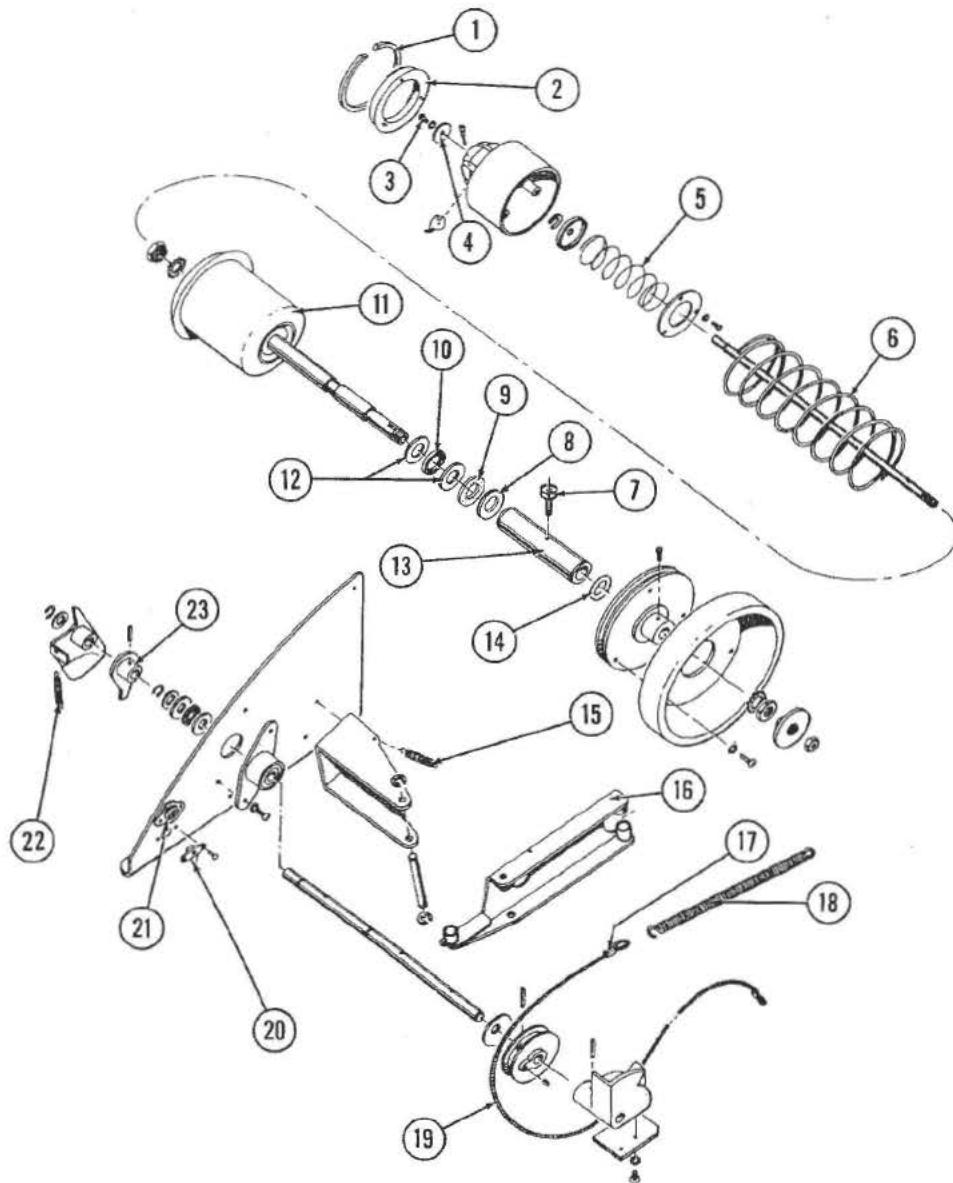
TURNTABLE SHAFT ASSEMBLY, RECORD CLAMP SHAFT,
